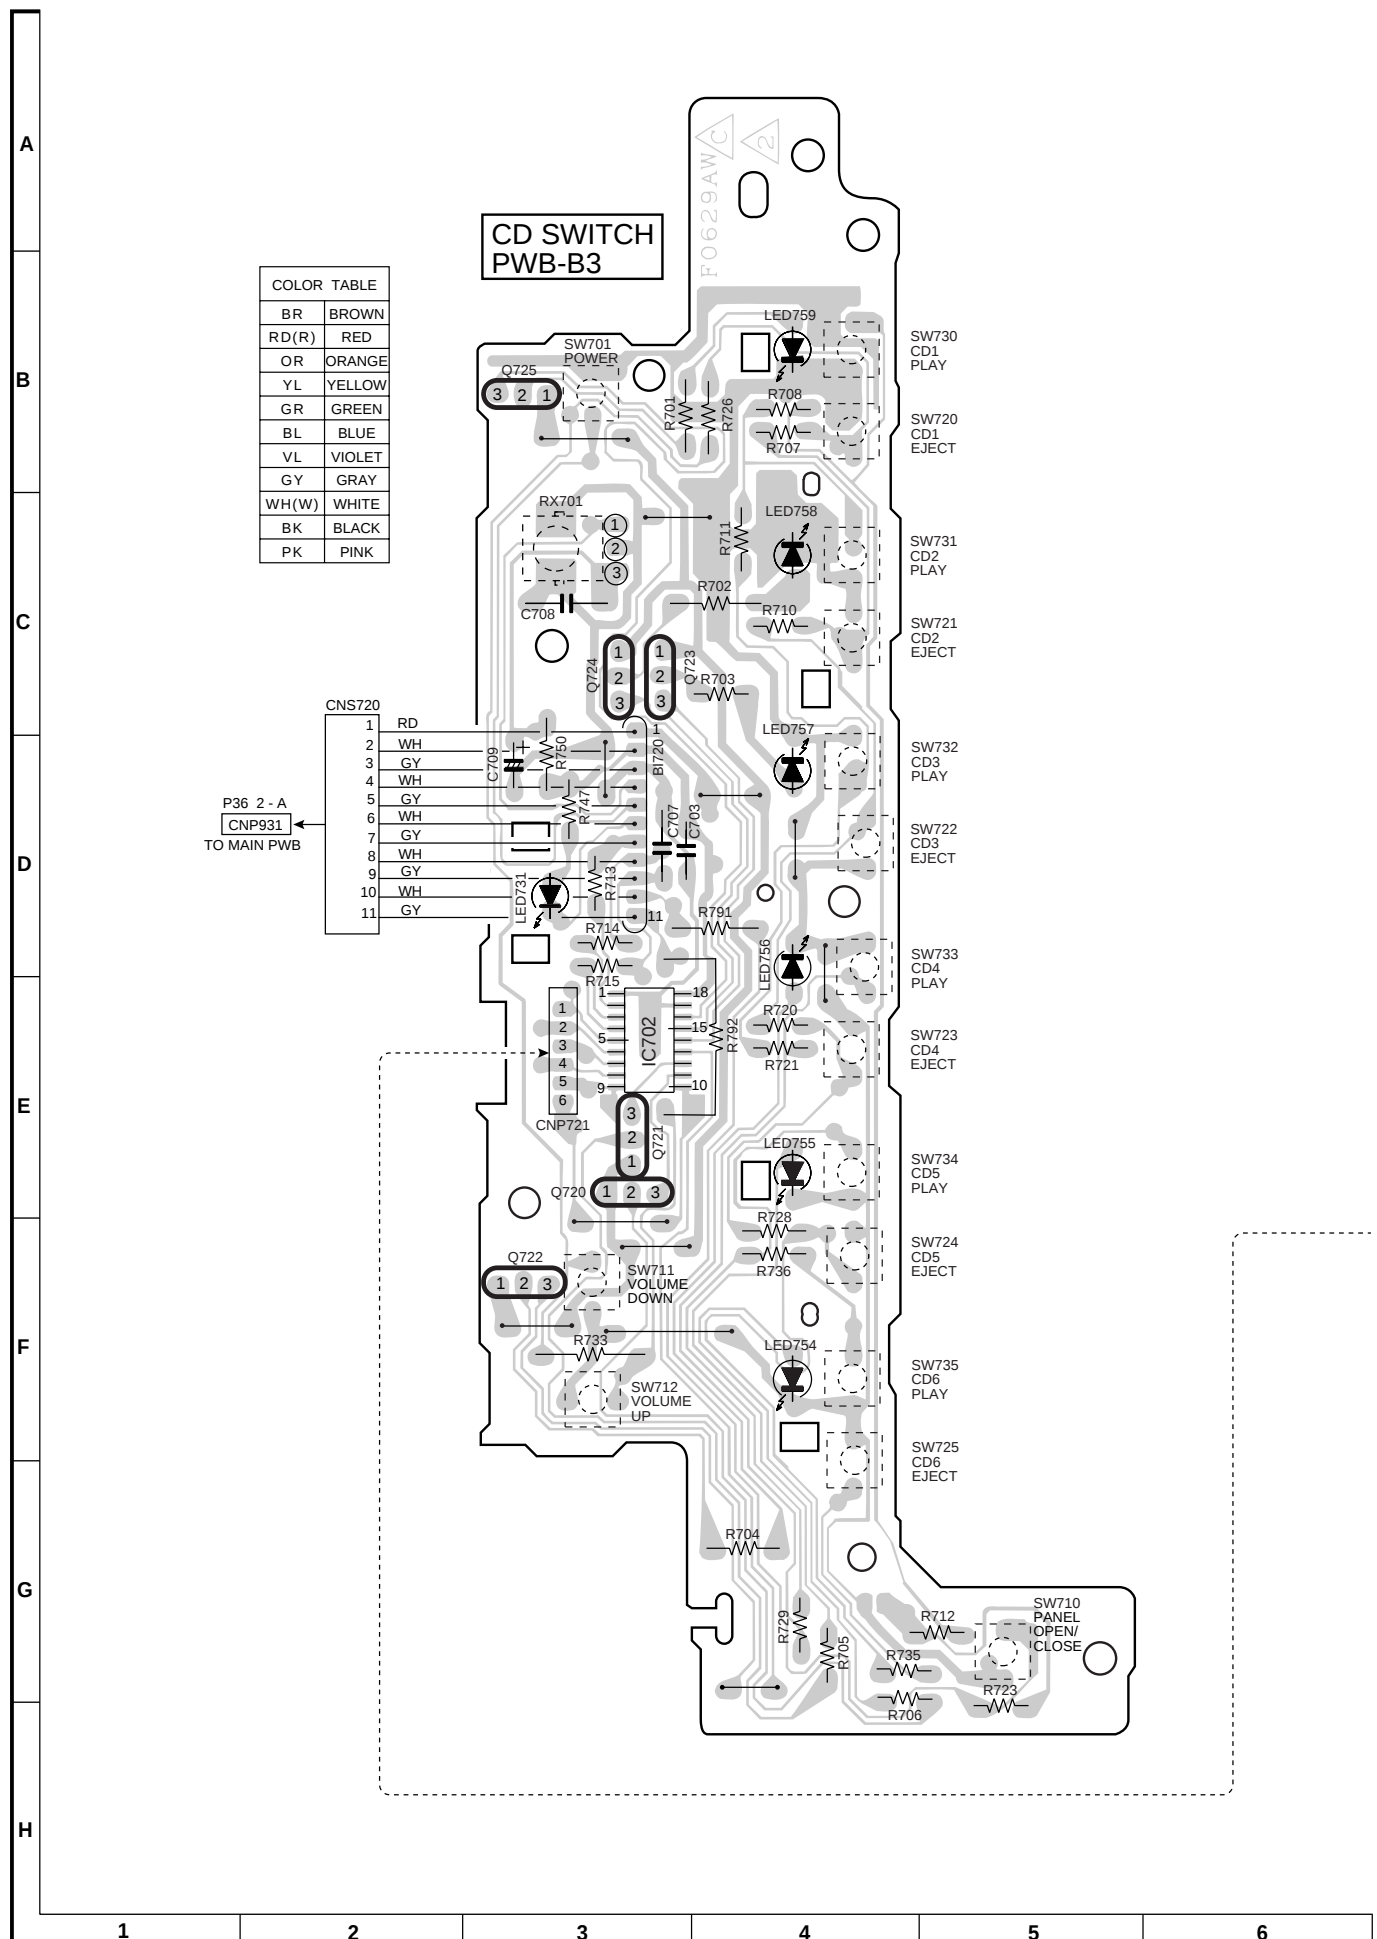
WIRING SIDE OF P.W.BOARD (7/10)
